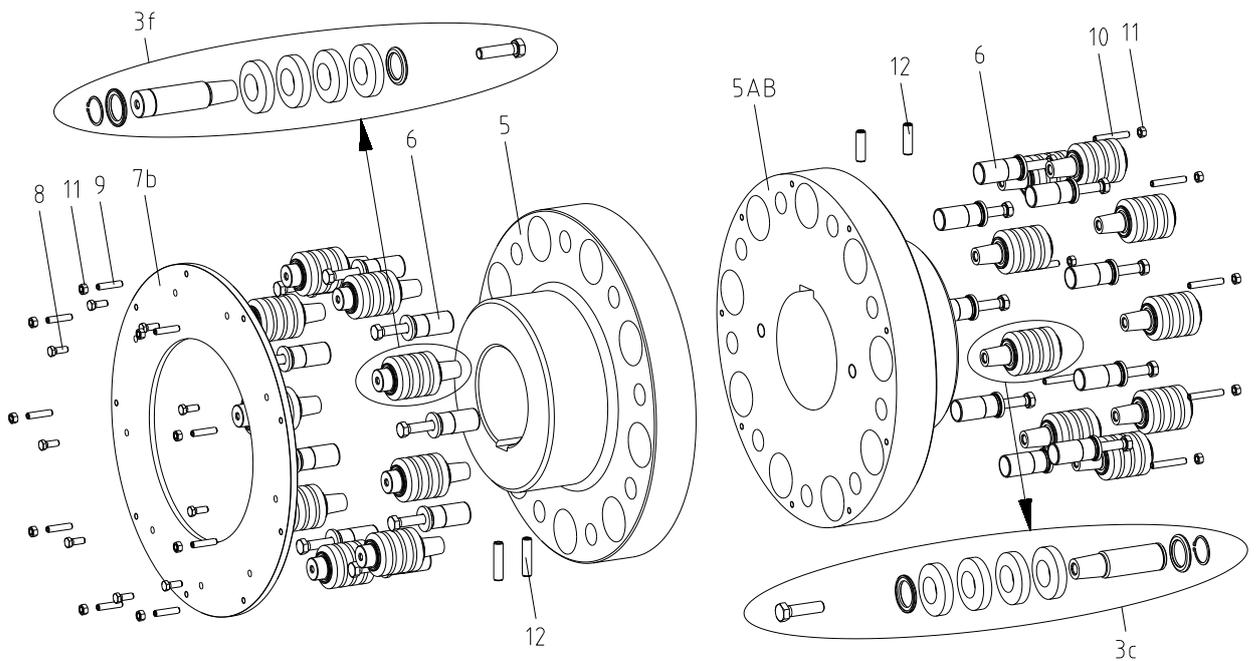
REVOLEX® type KX-D - AB (taper pin design B)
